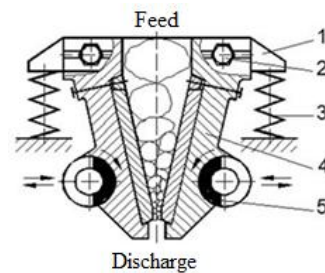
Single jaw drive vibratory jaw crusher
